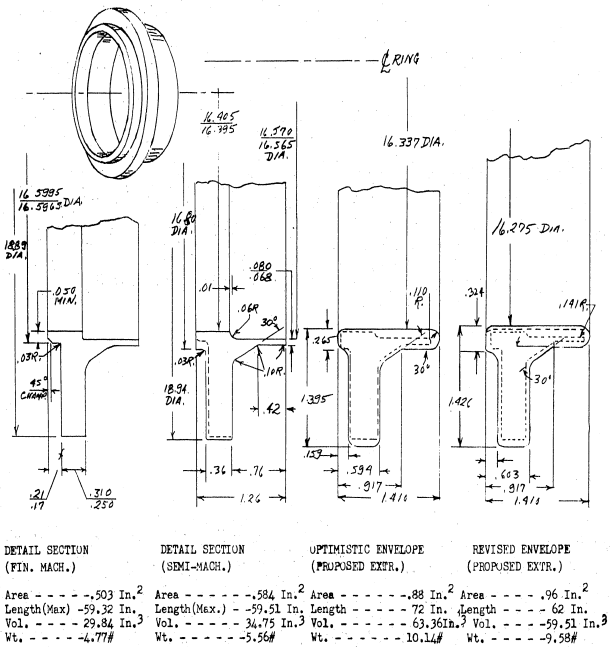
PRODUCTION EXTRUSION SHAPE FOR P/N 226962
